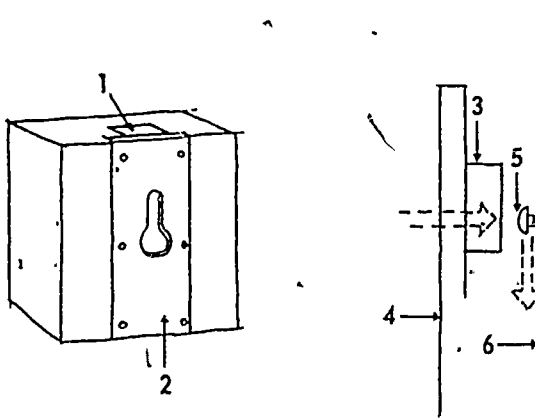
Keyhole mounting system. 1, cut-out area on block to receive screw head; 2, metal plate with keyhole, nailed to block; 3, keyhole block glued to back of panel; 4, panel; 5, round head screw with head a way from wall, to receive key-hole block; 6, wall or major panel.
